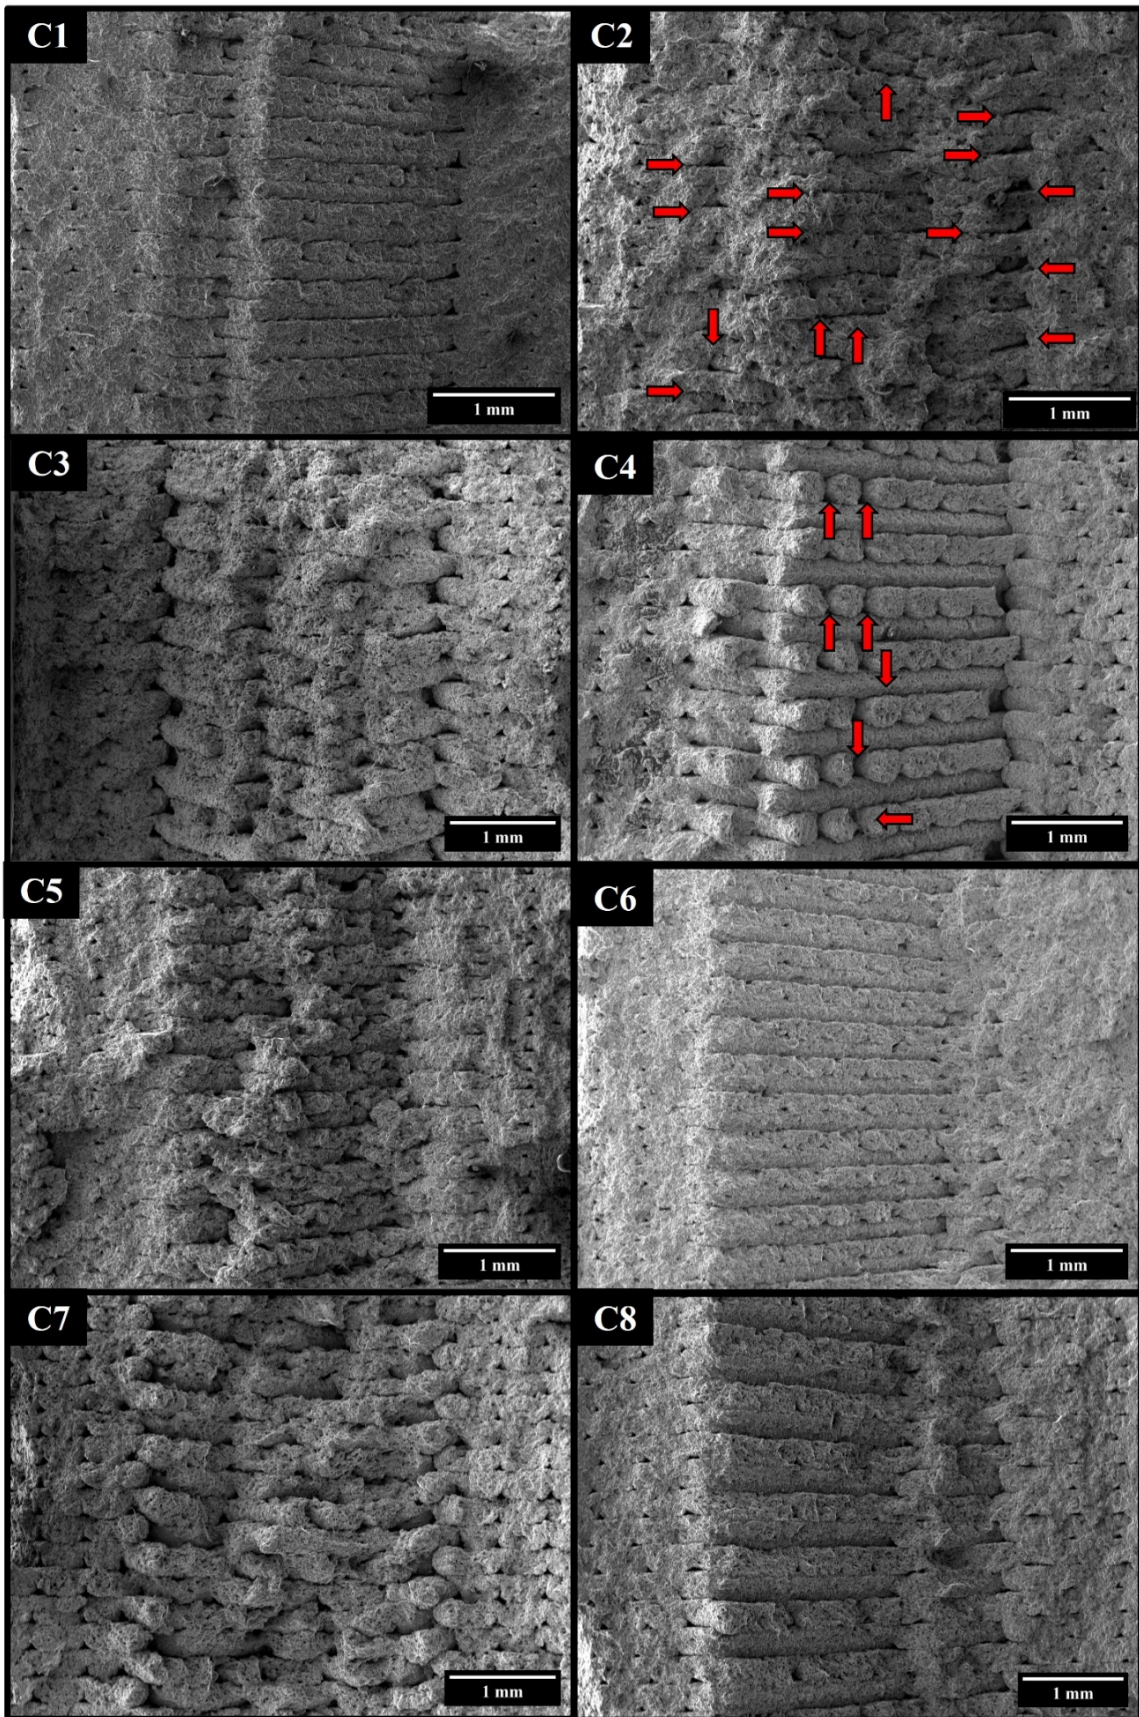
Fracture surfaces of the eight 3D printed configurations subjected to tensile tests.
